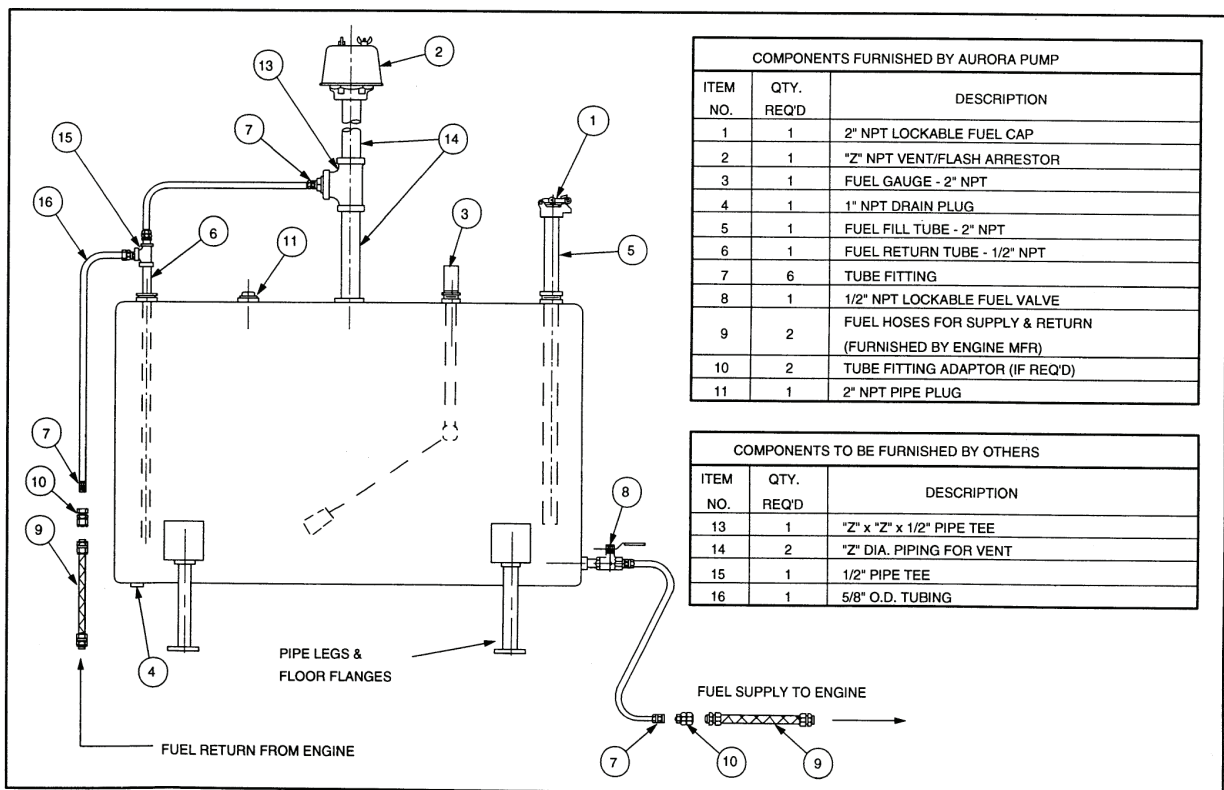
DIESEL FUEL TANK AND FITTINGS
